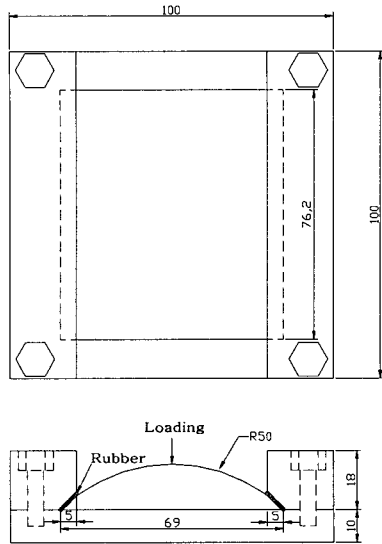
Overall view of test fixture with convex shell(R=50mm)
